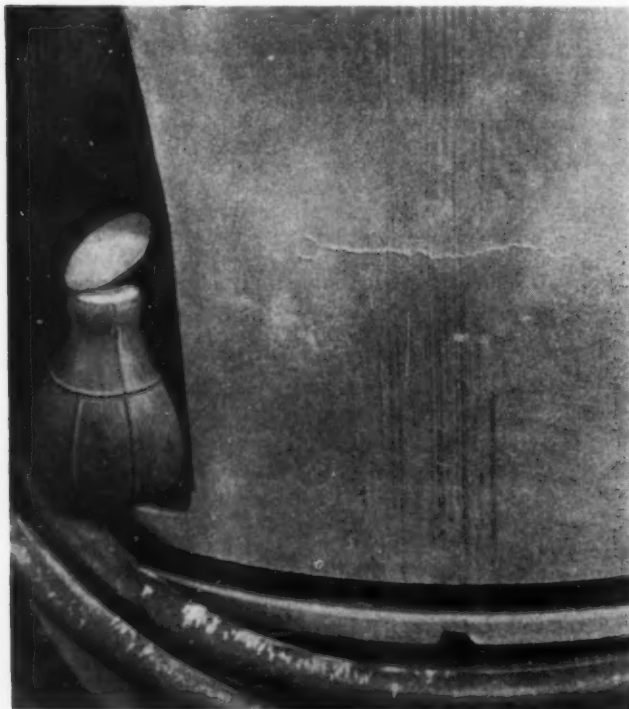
OLD CRACK IN PISTON SKIRT, SHOWING PLUGGED STOPPER HOLES
